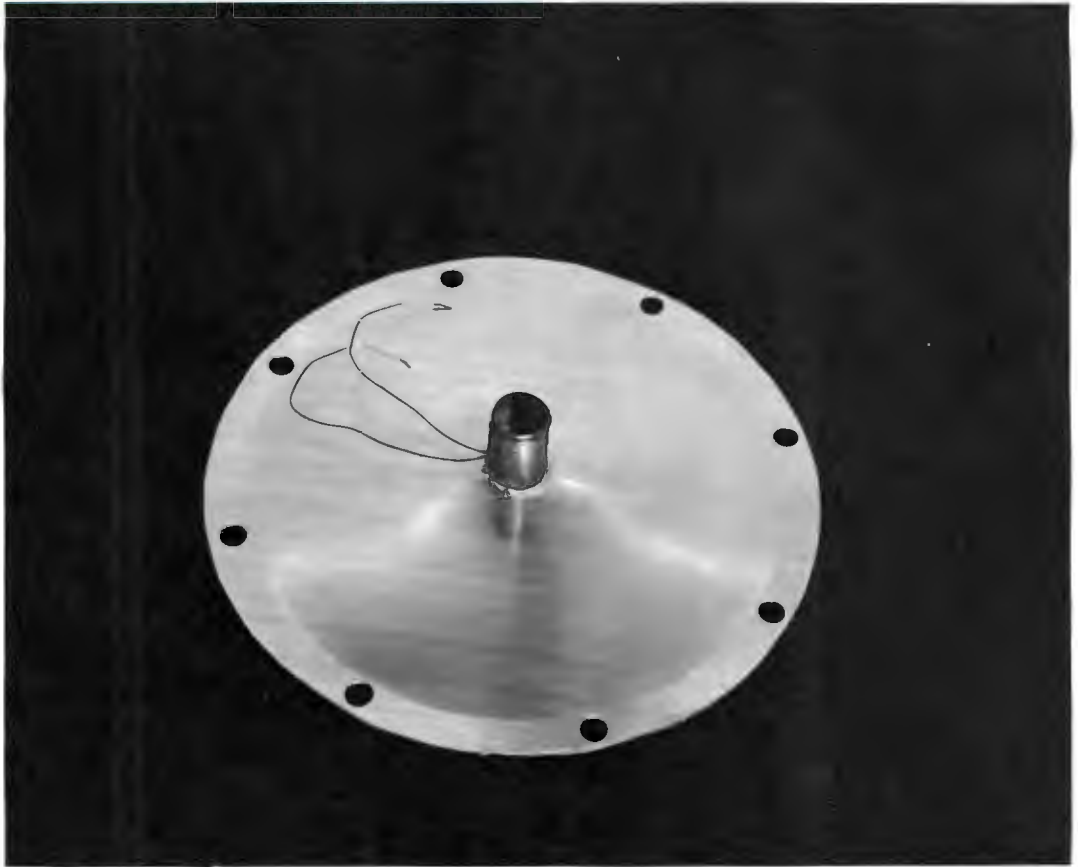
An impacted plate showing the sensing conductor and mounting tube
